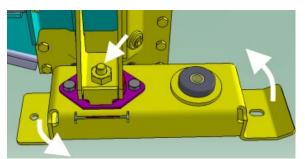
MOUNTING SUPPORT IN INITIAL POSITION
